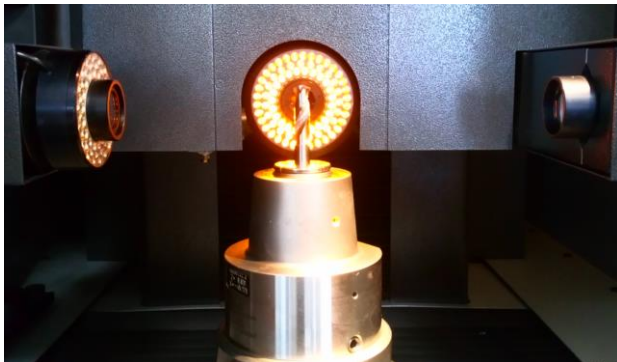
Measurement of cutting geometry on Device Zoller Genius 3s
